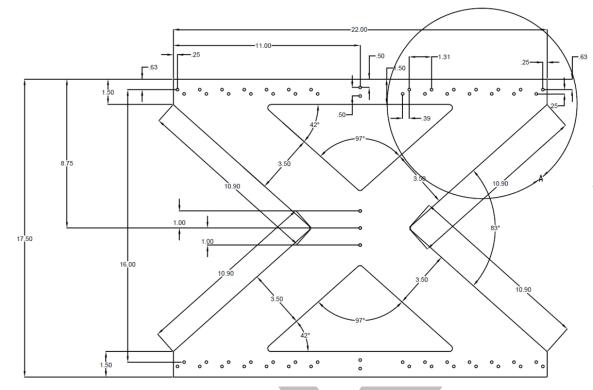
Shear-X[™] 16" Bracket Dimension Details
